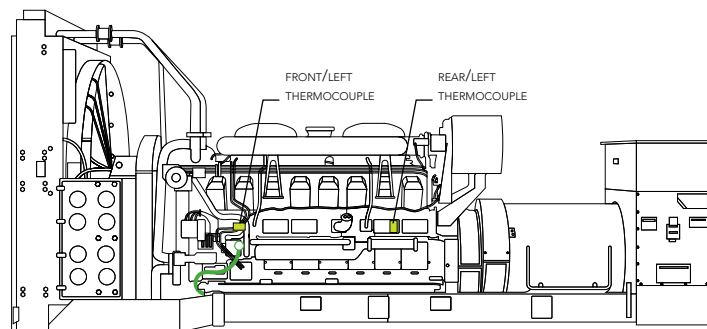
The test engine's left side, showing CSM supply port and thermocouples. To ensure effective heating was applied to both cylinder banks of the V-type engine using a single heater, the CSM supply port was installed on opposite side.
